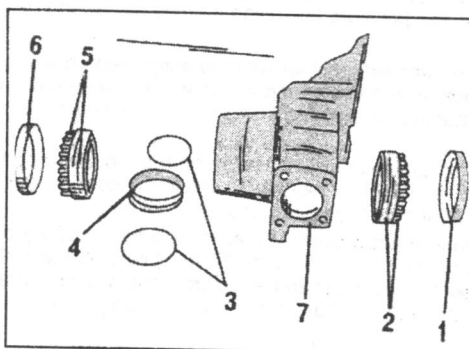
The component parts of a dismantled steering knuckle.
